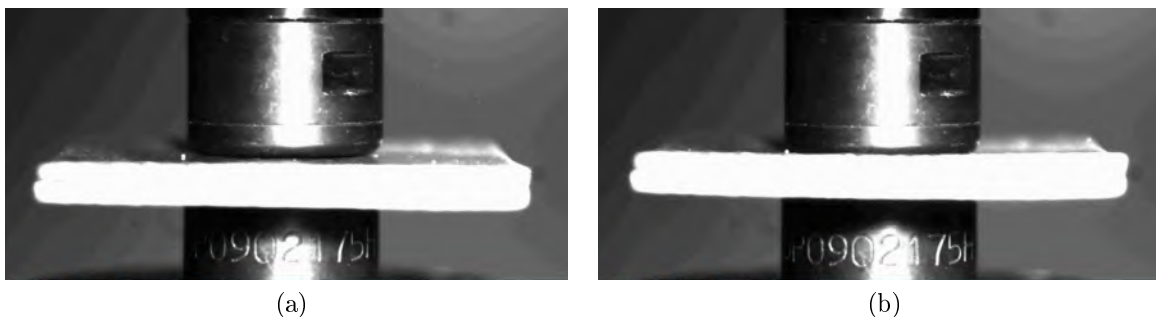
Comparison of images from a riveting cycle for joint A. (a) Start of rivet insertion. (b) During rivet insertion, just before the engagement of the disc springs in the clamping mechanism.
